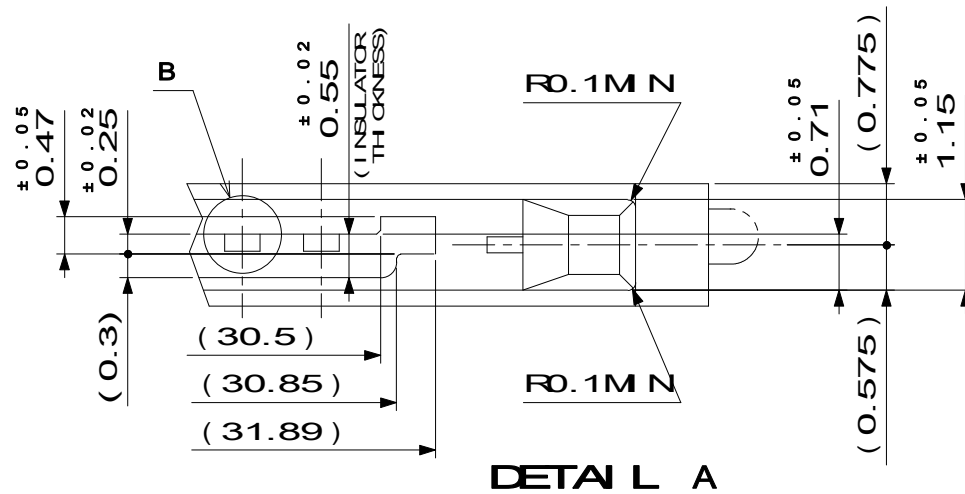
Panel-side Internal Cable Plug Connector (in unit of mm)
